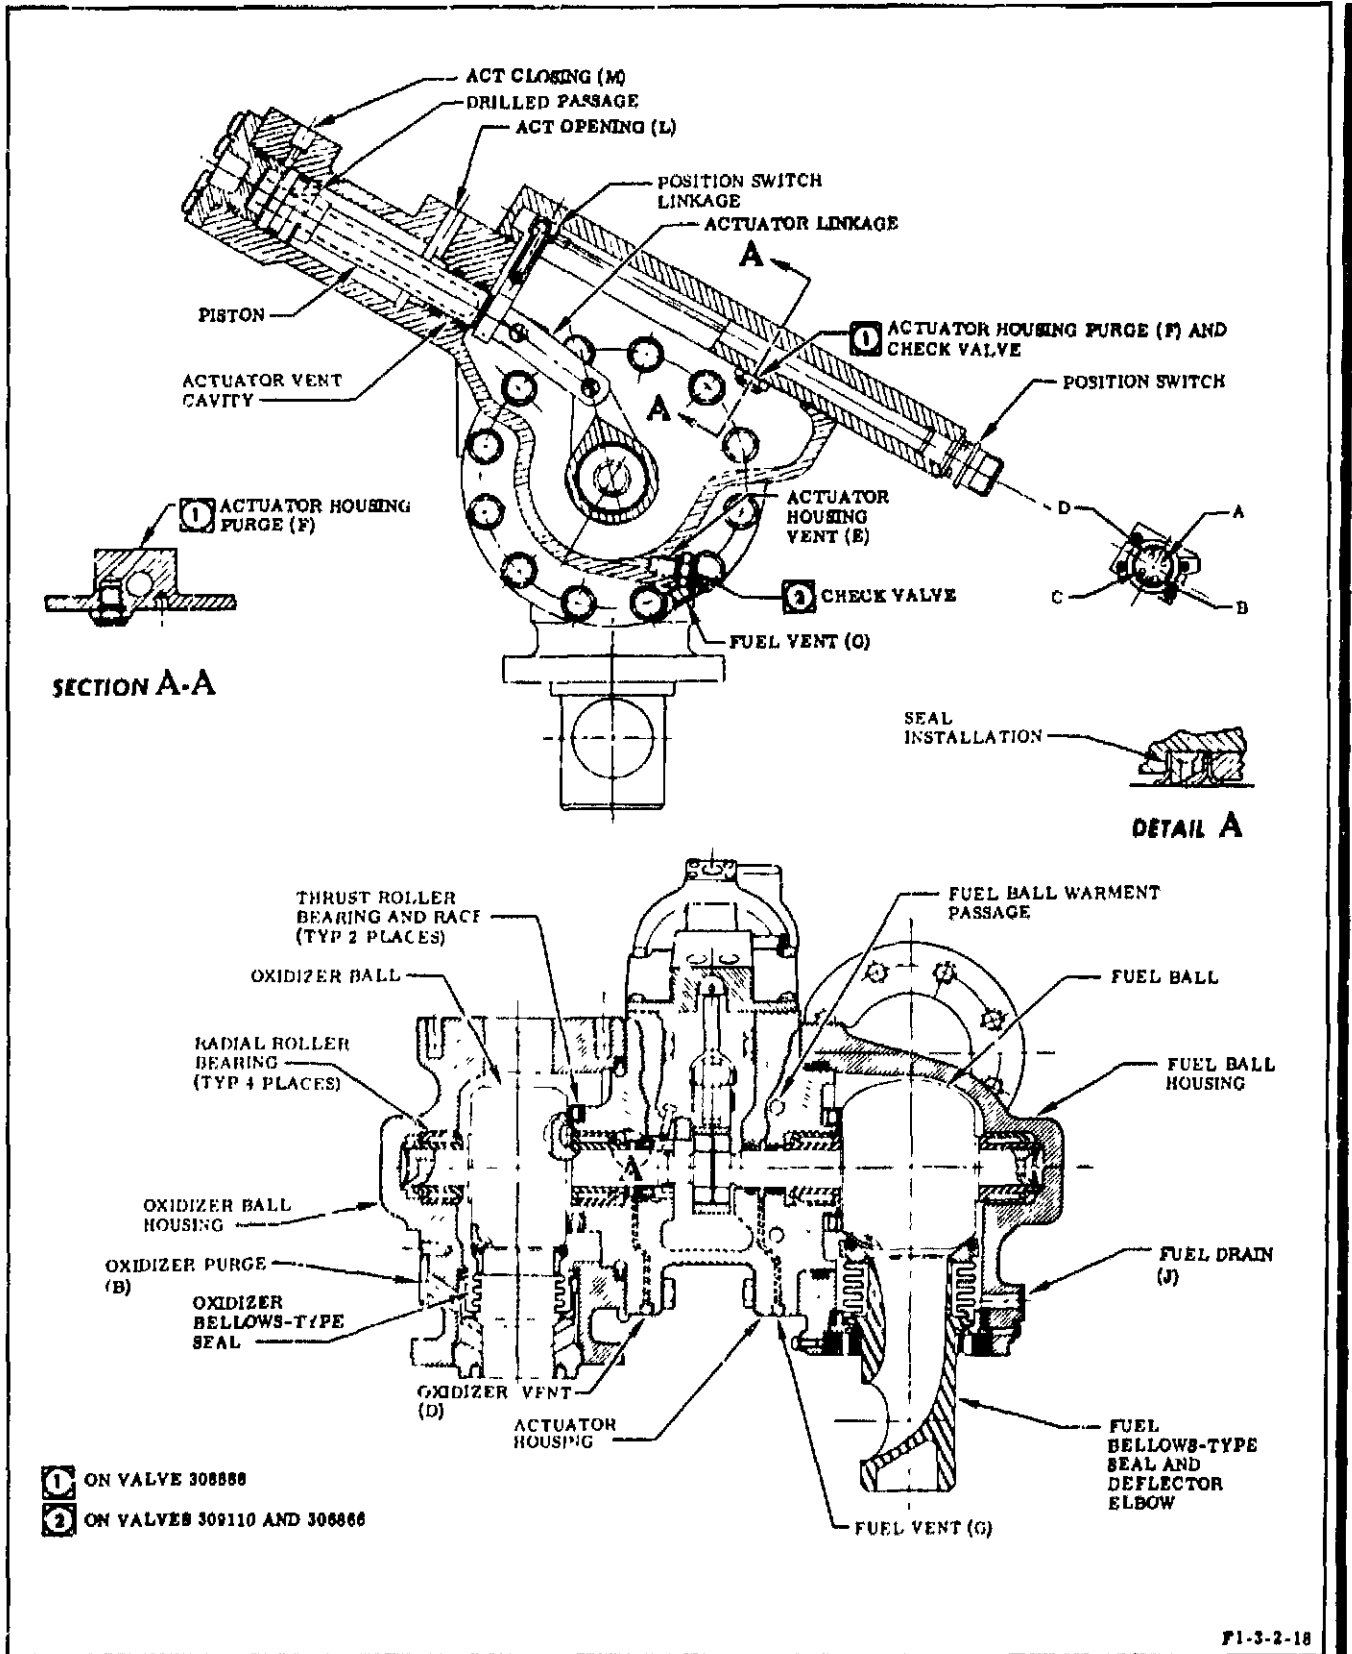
Gas Generator Ball Valve--Cutaway View
